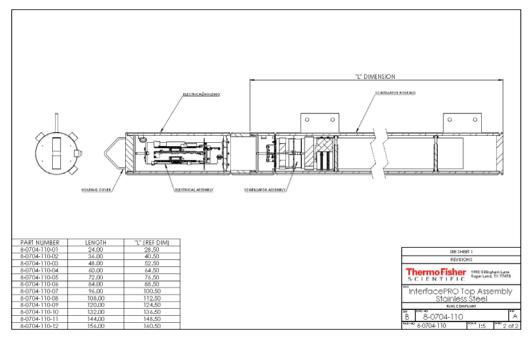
8-0704-110: Top Assembly, InterfacePRO (Sheet 2 of 2)
